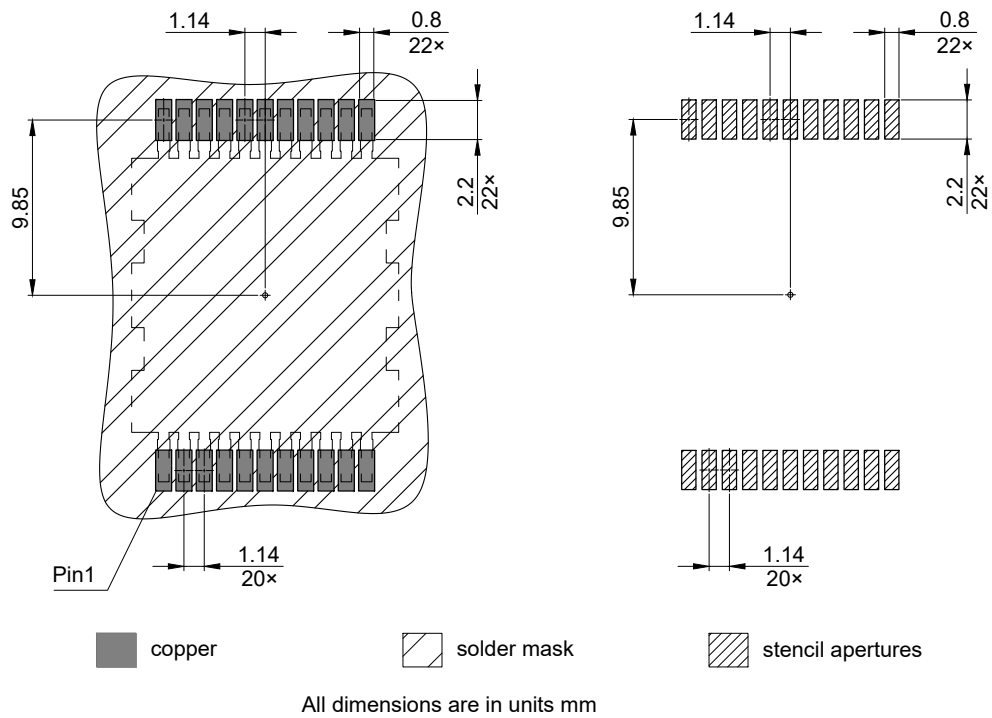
Footprint drawing PG-HDSOP-22, dimensions in mm
